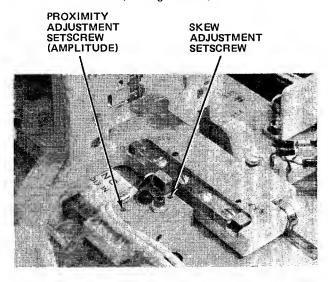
Cylinder Transducer, Rear Adjustment Screw
